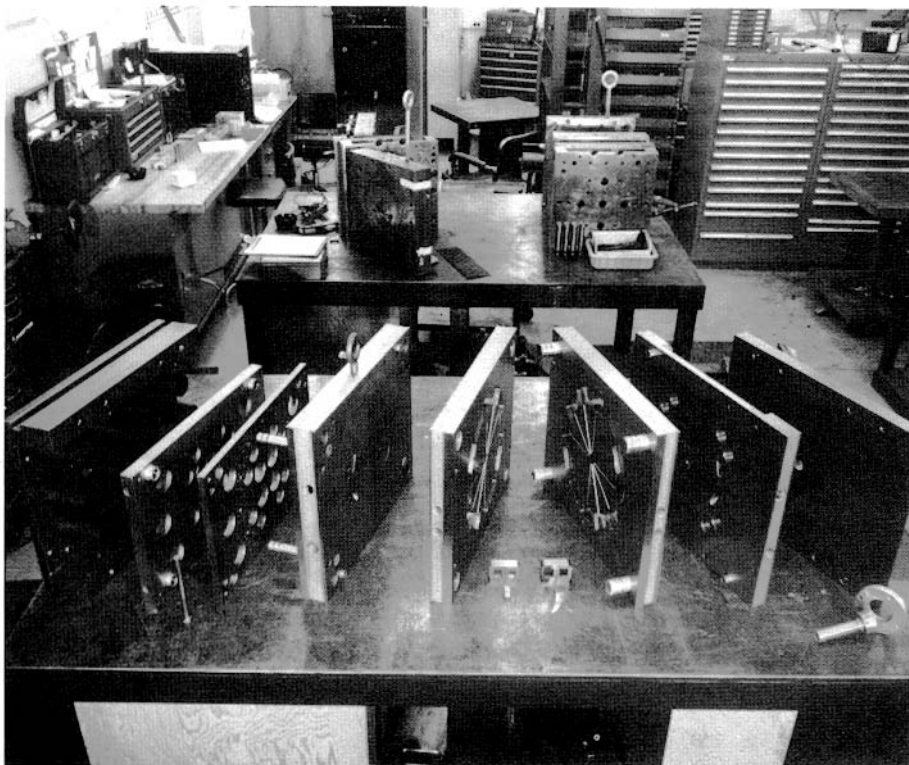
A disassembled 16-cavity lens mold awaiting assembly in the mold shop.
